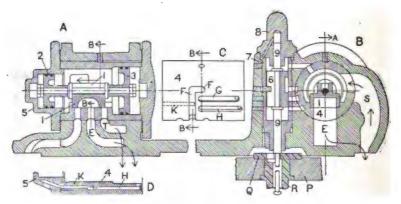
Valve-gear of the Westinghouse Air-brake Pump.
